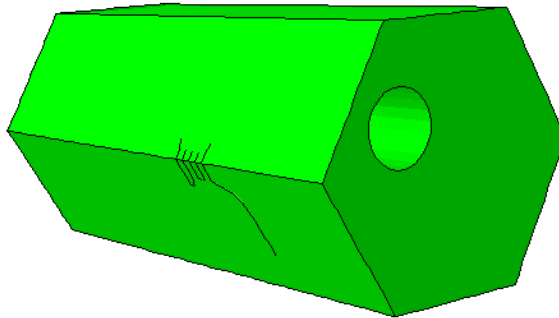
Crack on the outer edge of the graphite brick model (Specimen 28).
